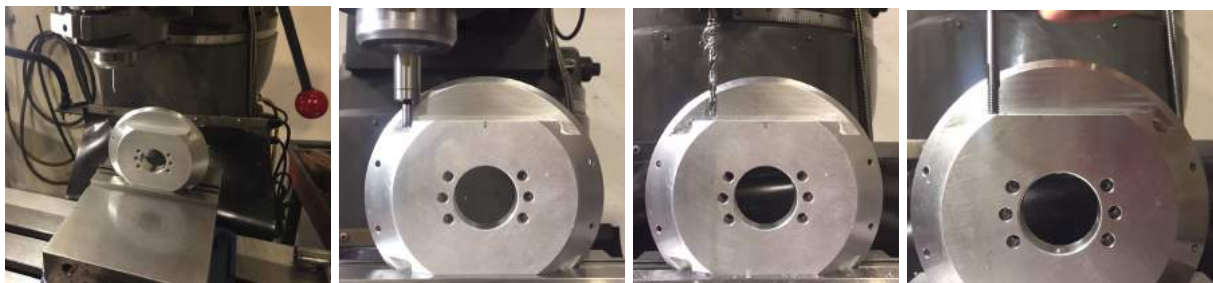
Mounting Block (Left), Locating (Left Center), Drilling (Right Center), Tapping (Right).
